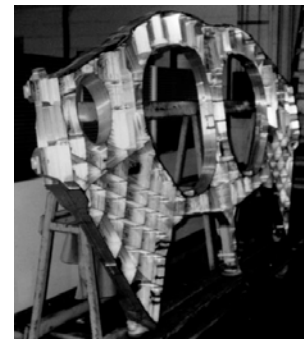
Machined titanium bulkhead forging for a twin-engine aircraft [37].
